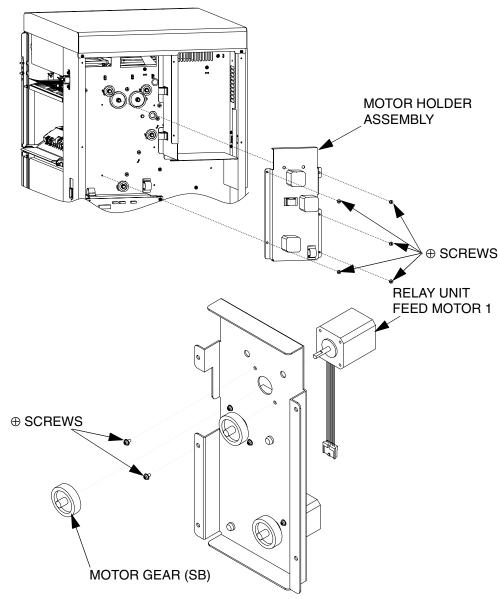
Removal of the Relay Unit Feed Motor 1
